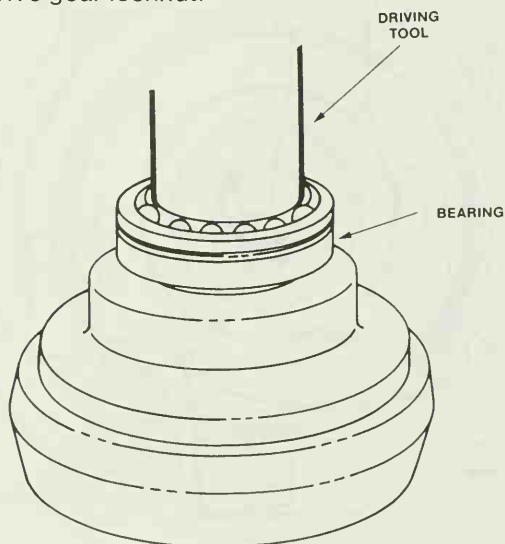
Installing the mainshaft bearing. (American Motors Corporation)
